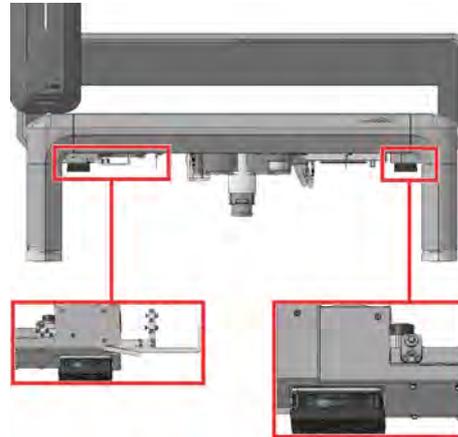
INSTALLATION LOCATION OF THE FILTERS OF THE X-AXIS DRIVE FANS (VIEW FROM FRONT)
